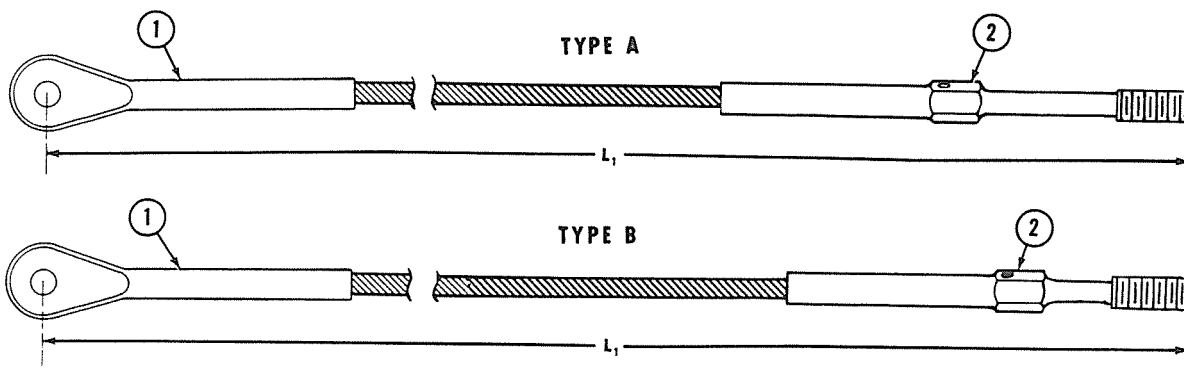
(Sheet 6 of 7 Sheets). Elevator and Elevator Spring Control Tab Control System — Cable Chart and Cable Assemblies
